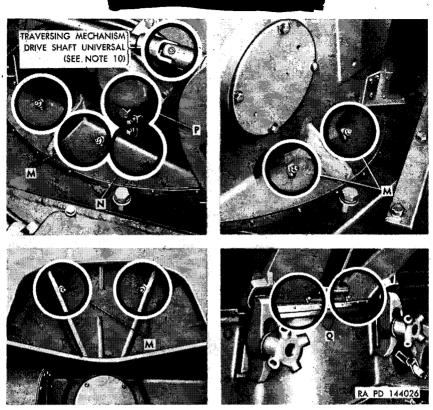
Localized lubrication points-155-mm howitzer mount M14.
